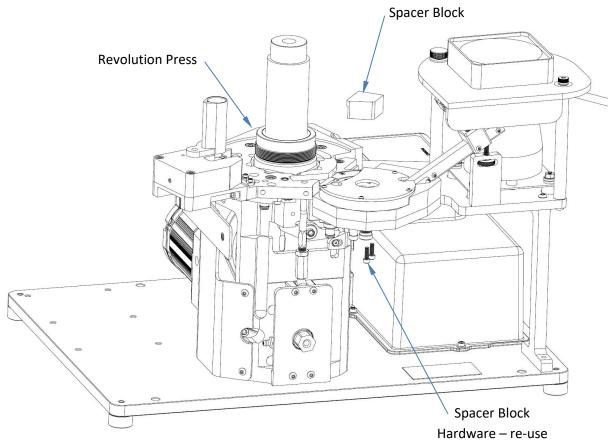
Revolution Press Top End disassembled for Sensor Installation
